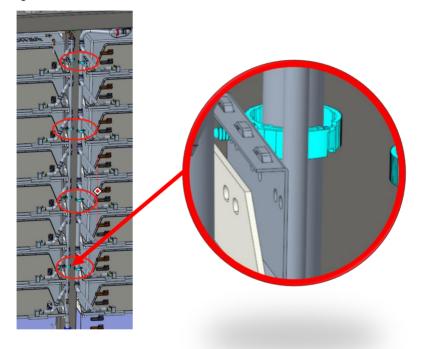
Fix secondary inlet pipeline to the inner hole of the sheet metal part
